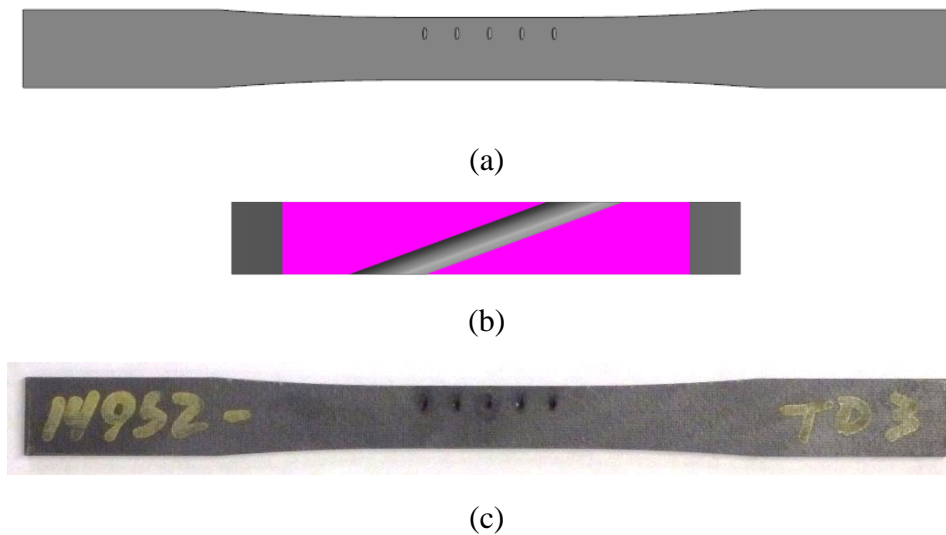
(a) Nominal specimen model with simulated cooling holes (b) Cross-section view depicting simulated cooling hole placement (c) As-manufactured test specimen
